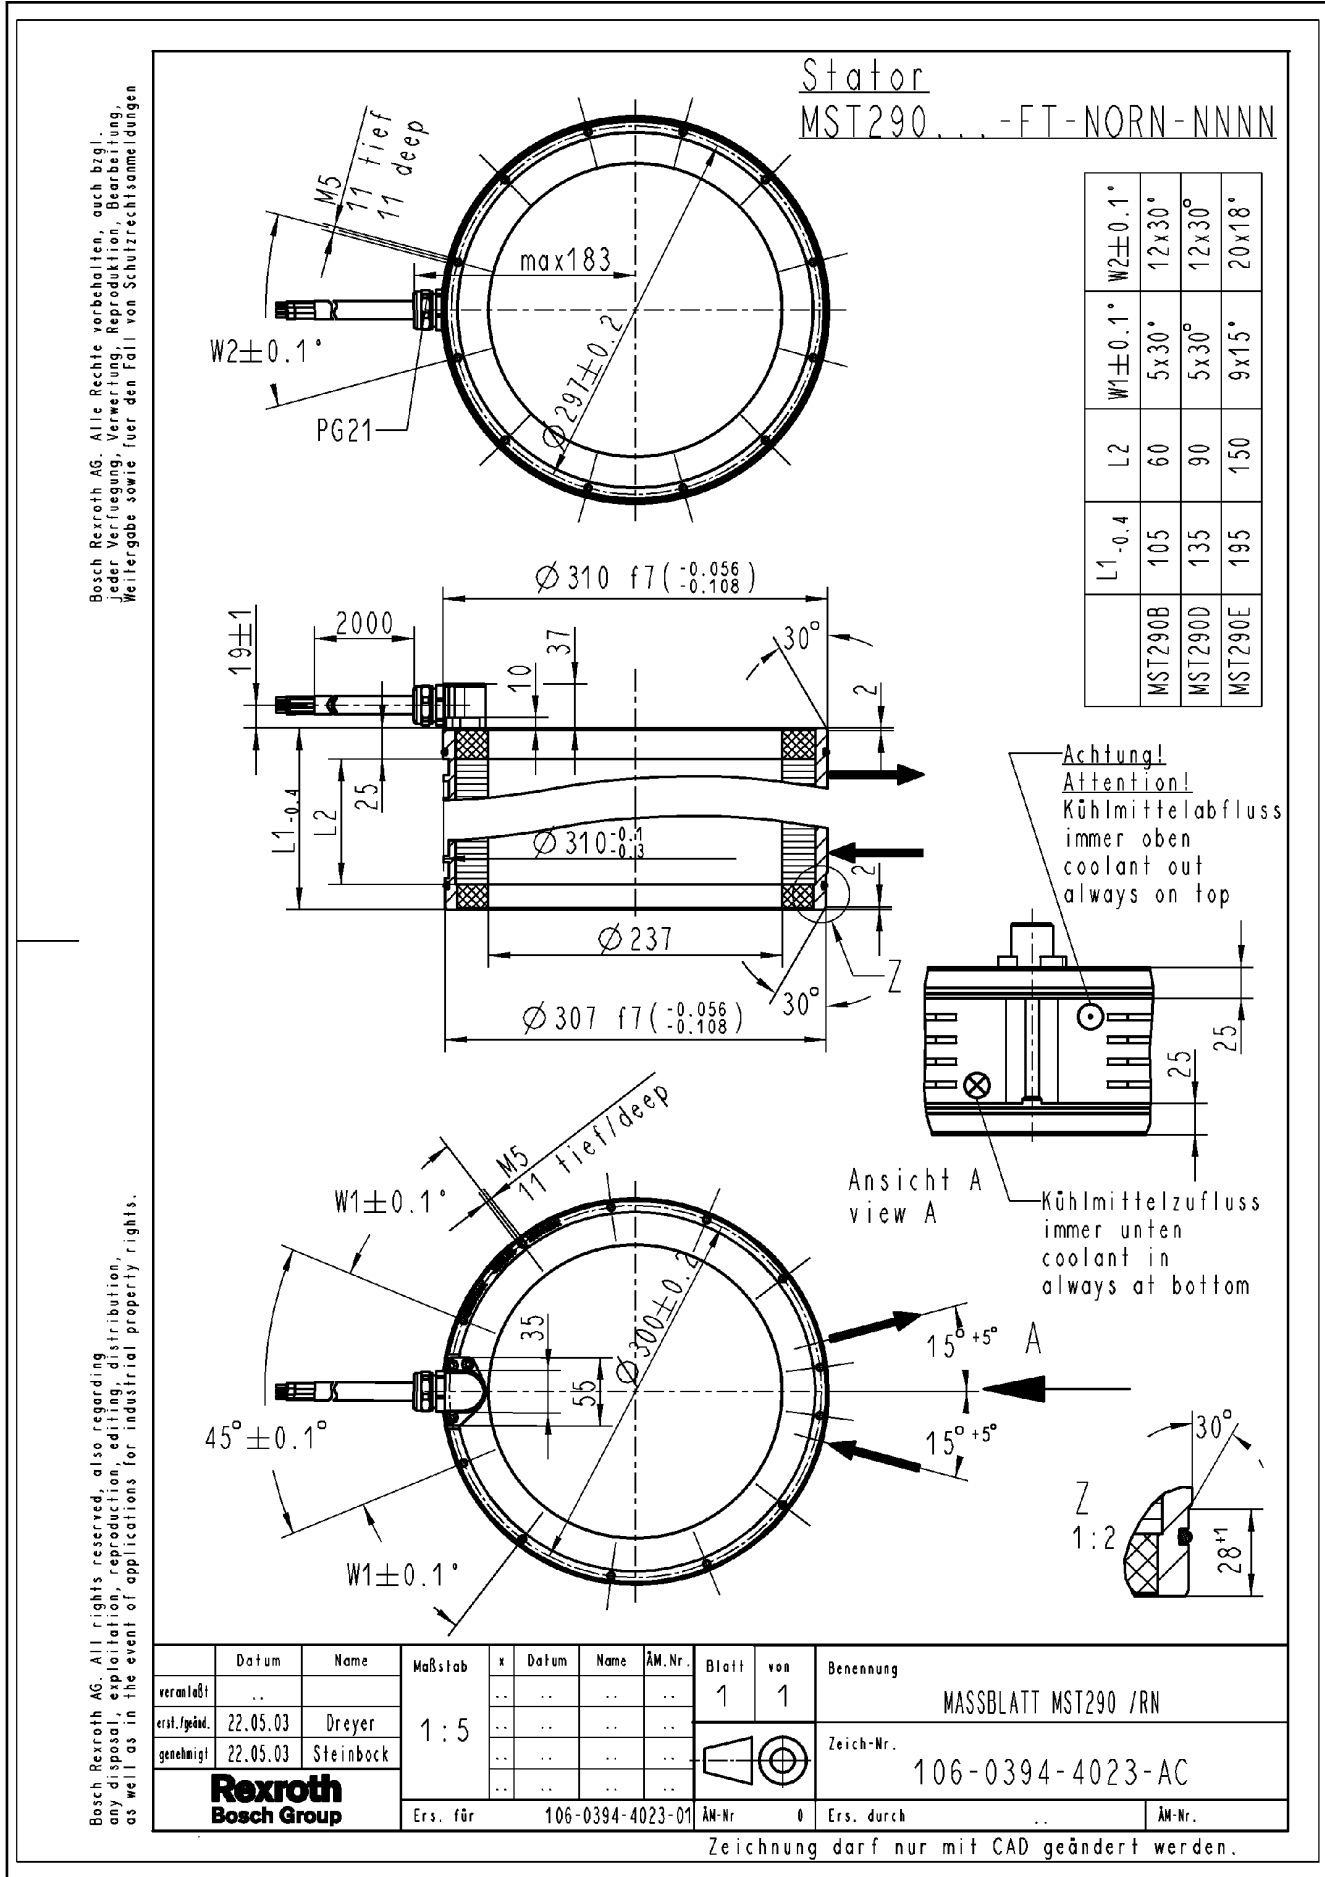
Dimension sheet MST290, electrical connection "RN"
